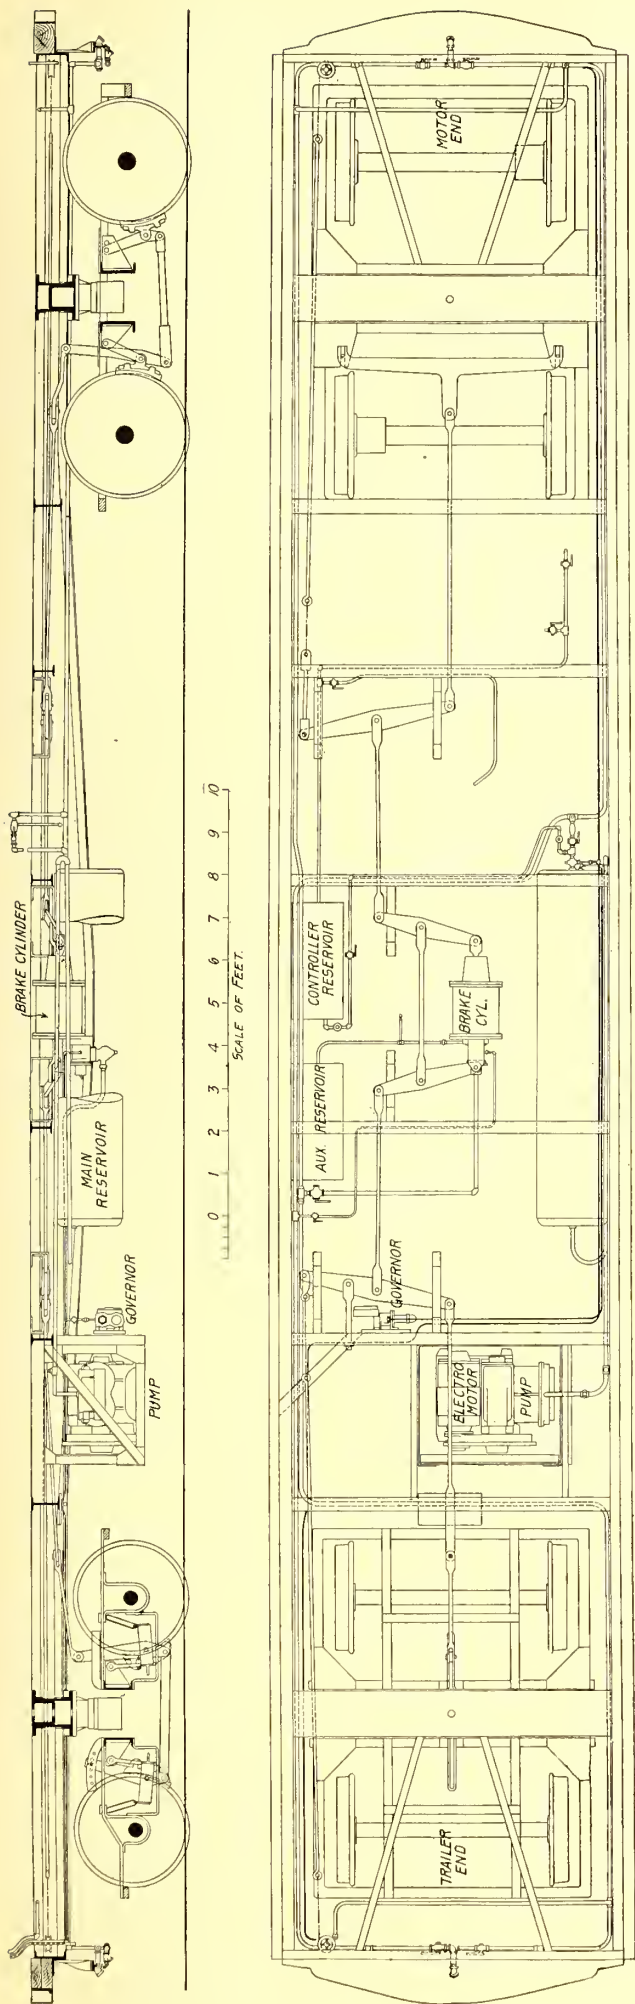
PLAN AND ELEVATION OF FLOOR FRAMING OF CAR, SHOWING BRAKE RIGGING AND PIPE LINES
